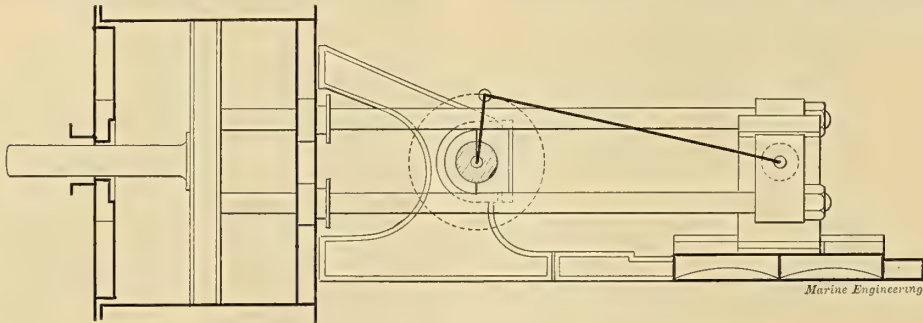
RETURN CONNECTING ROD ENGINE.
